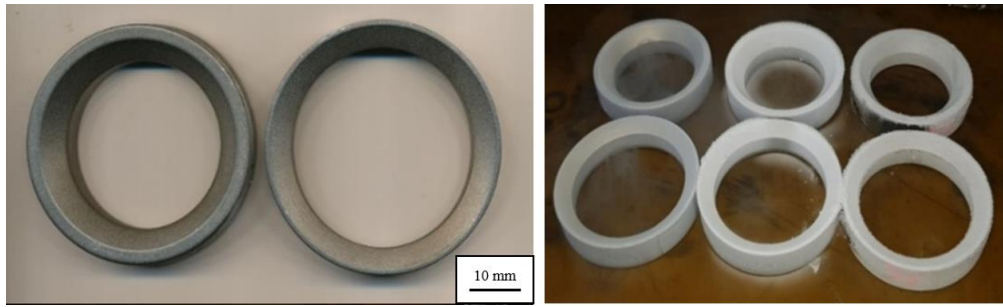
Cast valve seats – left, semi-finished valve seats after freezing – right
